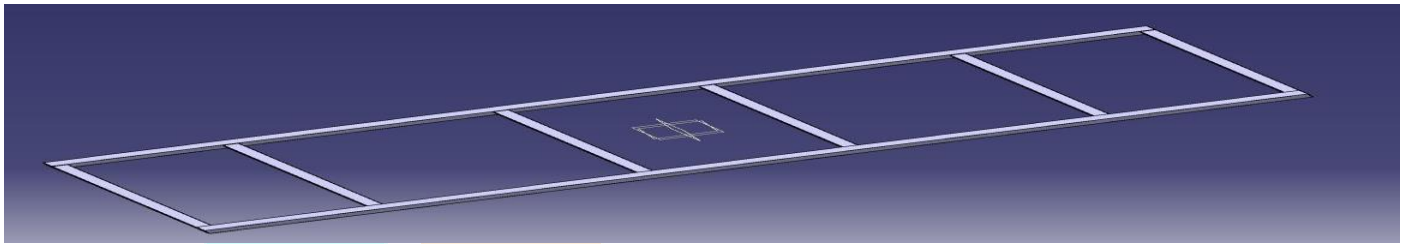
CAD model of Rectangular Section Ladder Chassis
